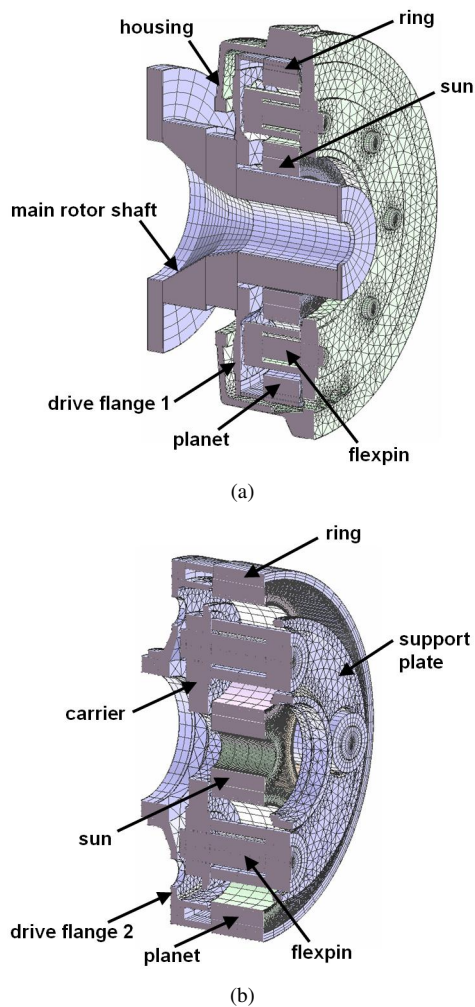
CUTAWAY VIEW OF THE FINITE ELEMENT MODEL OF: (a) STAGE 1, AND (b) STAGE 2.
